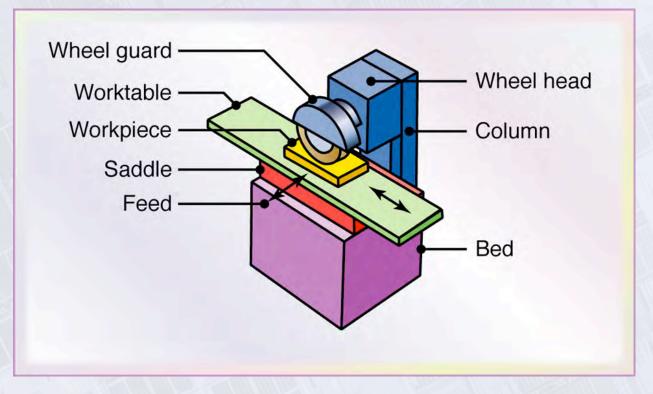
Schematic illustration of a horizontal-spindle surface grinder.
